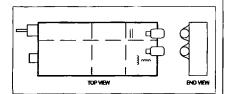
(a). Soldering two phono connectors to the top edge of the tuner's case. The end view shows jumper wires soldered over the connector's mounting to increase the mechanical support.
